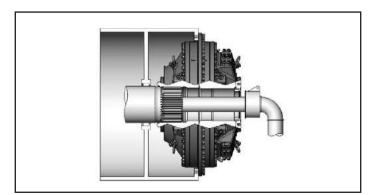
Flange mounted motor with splines and through hole for cooling of the driven machine.
